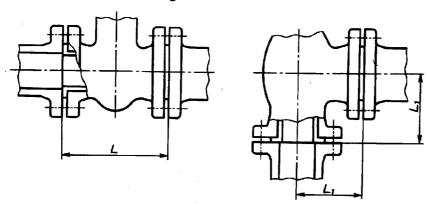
Face-to-face and End-to-end Dimensions (where rubber seat and the like constitute the end face)
